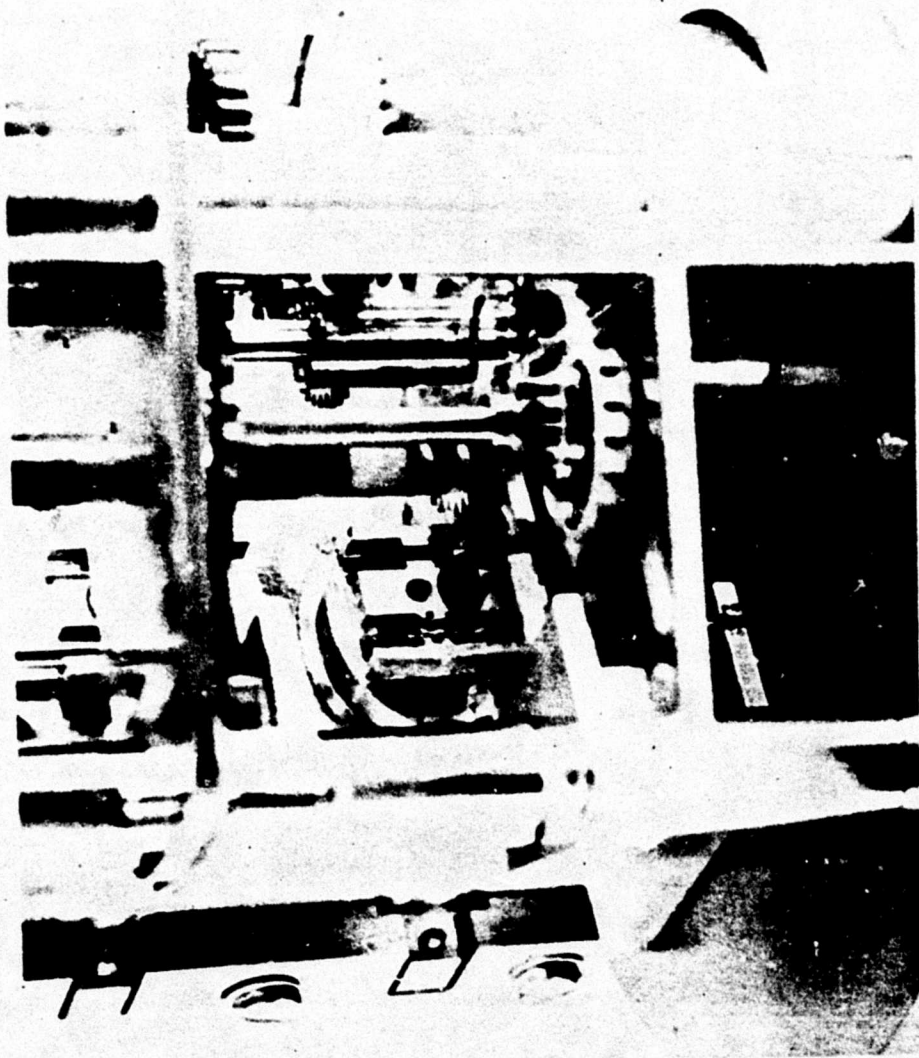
Gear Train Assembly-Ratchet Wheel Feature
